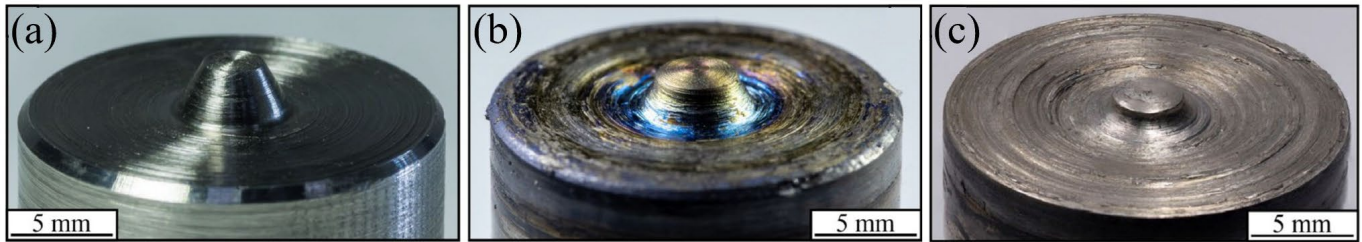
Butt FSW of 2.5 mm thick Ti6Al4V. (a) FSW tool produced from alloy ZhS6U before welding, (b) after ~2 m of welding, and (c) after ~2 m of welding without water cooling (ω 340–380 rpm, v 86 mm/min) [162].
